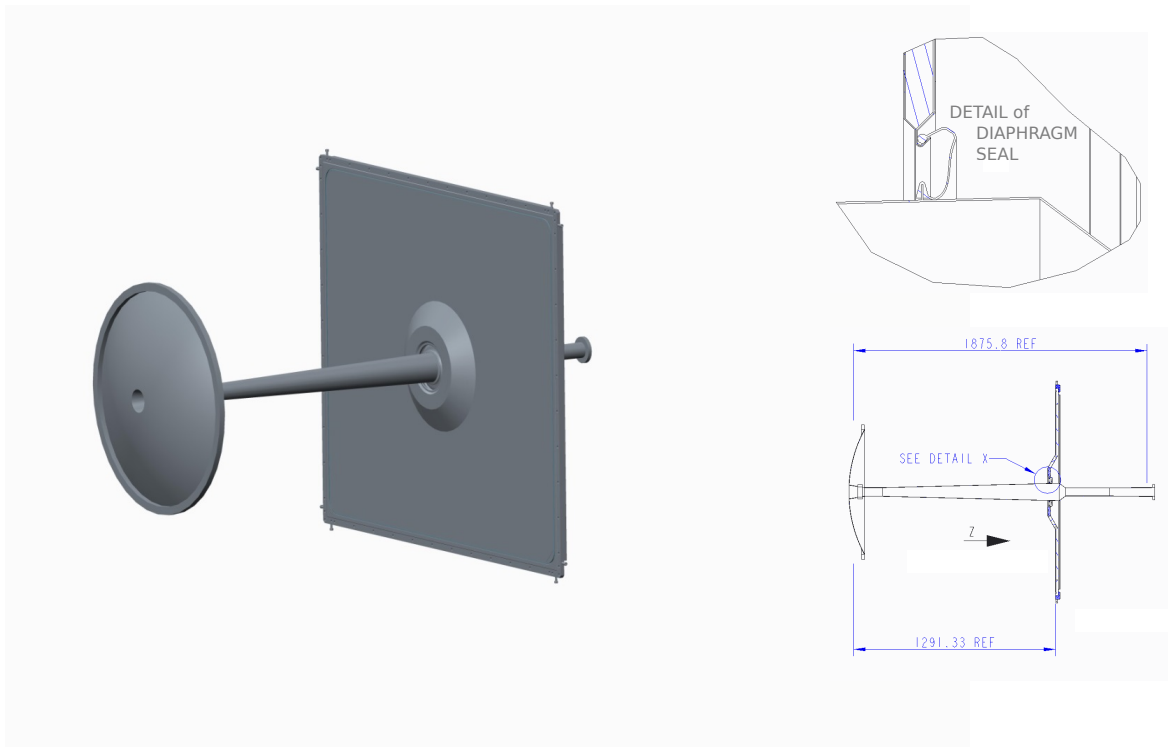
(Left) The exit window and the 25 mrad section of the beam pipe. The current window dimensions in (x, y) are $1604 \text{ mm} \times 1370 \text{ mm}$, (Right) Detail showing the tapered section of the window, with silicone rubber diaphragm seal to the beam pipe.
